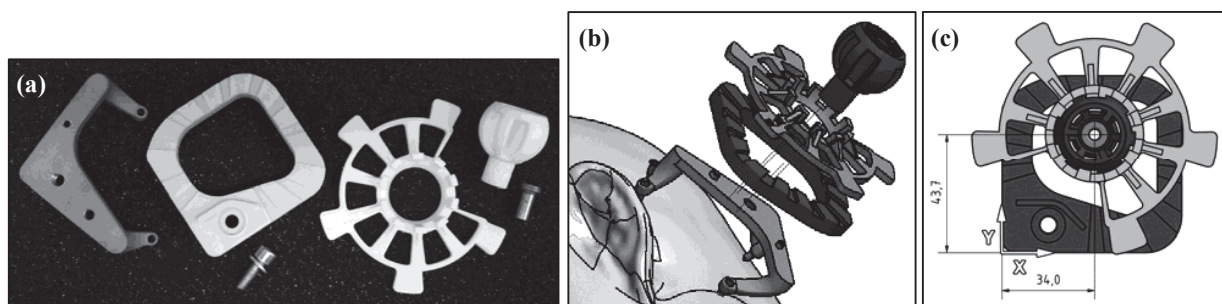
(a) Single components of the proposed surgical template including reference frame (Trifix), base plate, fixation screw, subcarrier, drill bushing holder and drill bushing. (b) Schematic drawing of the micro-stereotactic frame, showing its desired location behind the pinna. (c) Top view indicating the right-hand master coordinate system at the corner of the reference frame. In this example the starting point of the trajectory is $P_s = [34.0; 43.7; 0.0]$.
